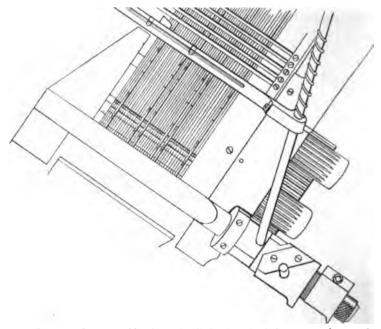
Typograph; assembly-channel filled with single-letter matrices and vice-jaw closed ready for line-justification.
